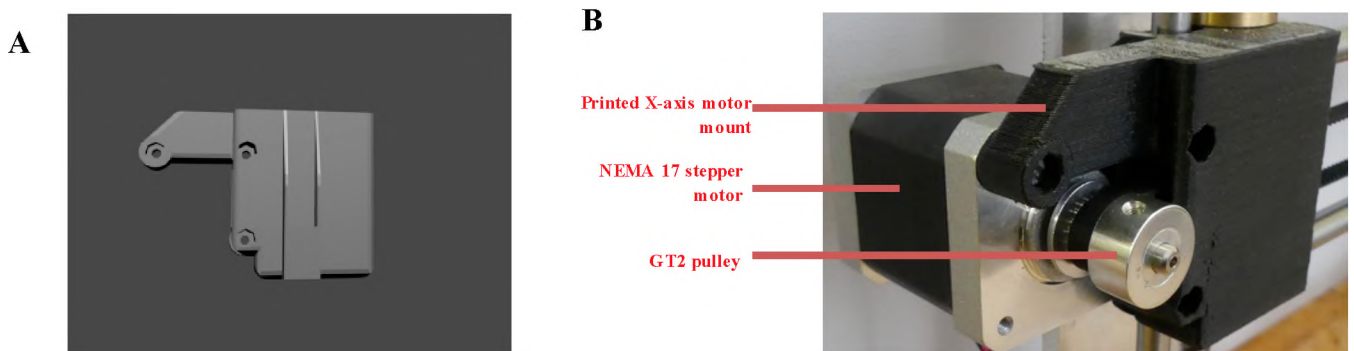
X-end motor mount. A: Printed X-end motor mount. B: Assembled X-end motor mount.
